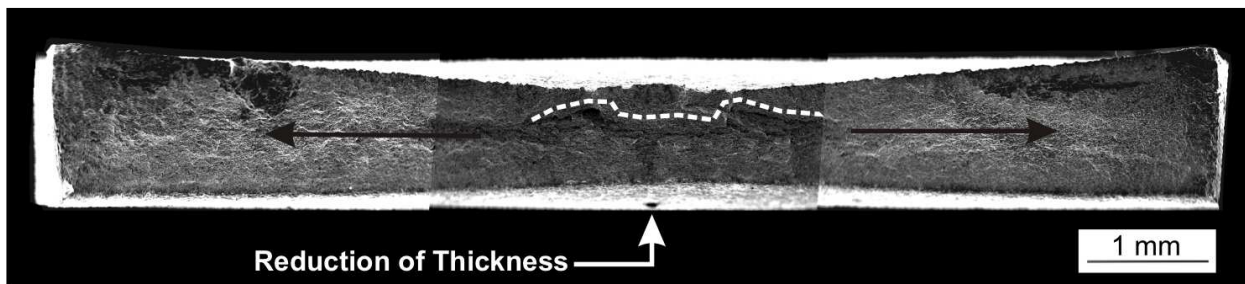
Top view of a typical fracture surface from a DP600 ‘16s’ base-metal specimen.
